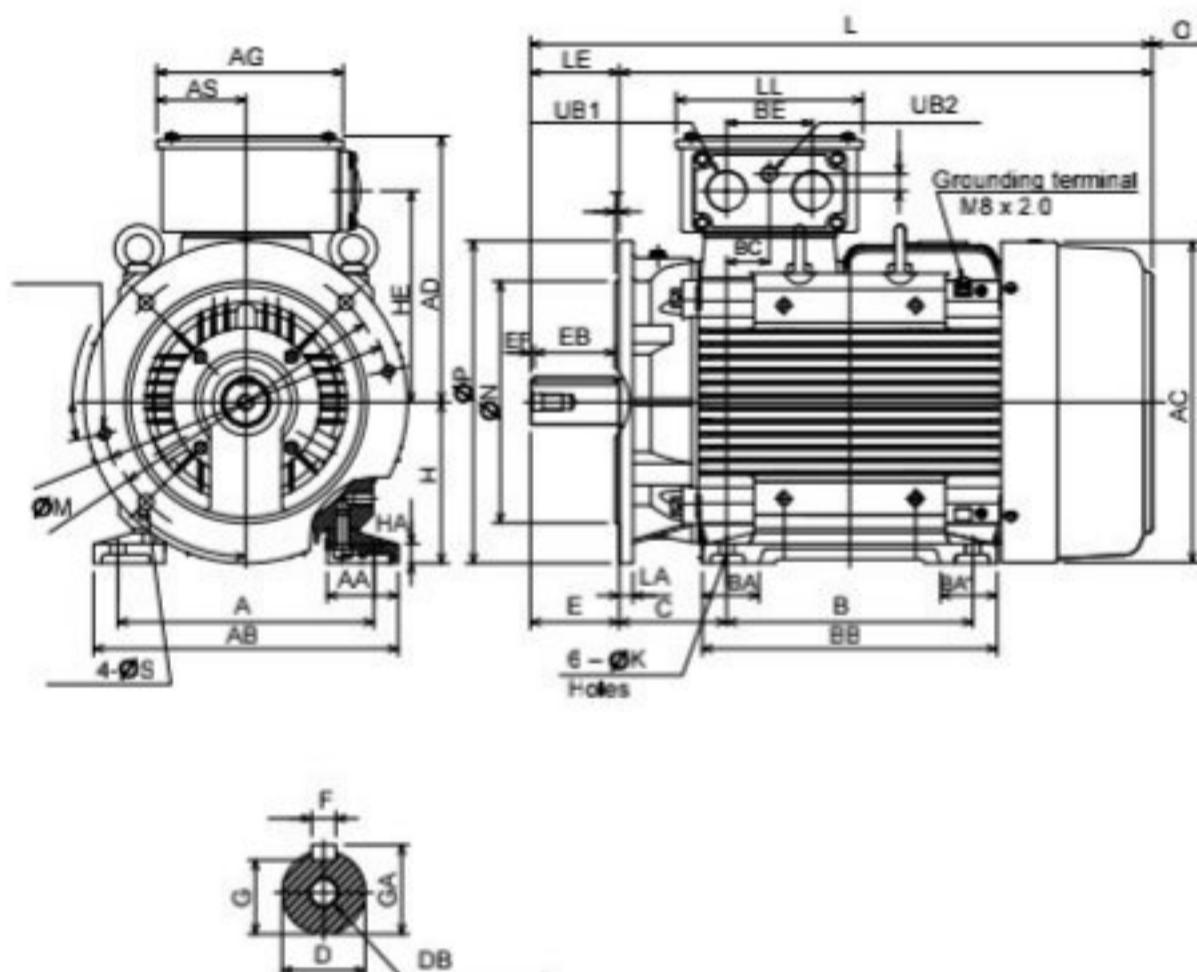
Outline drawing of cast iron design, mounting B35; frame size 200 – 250
